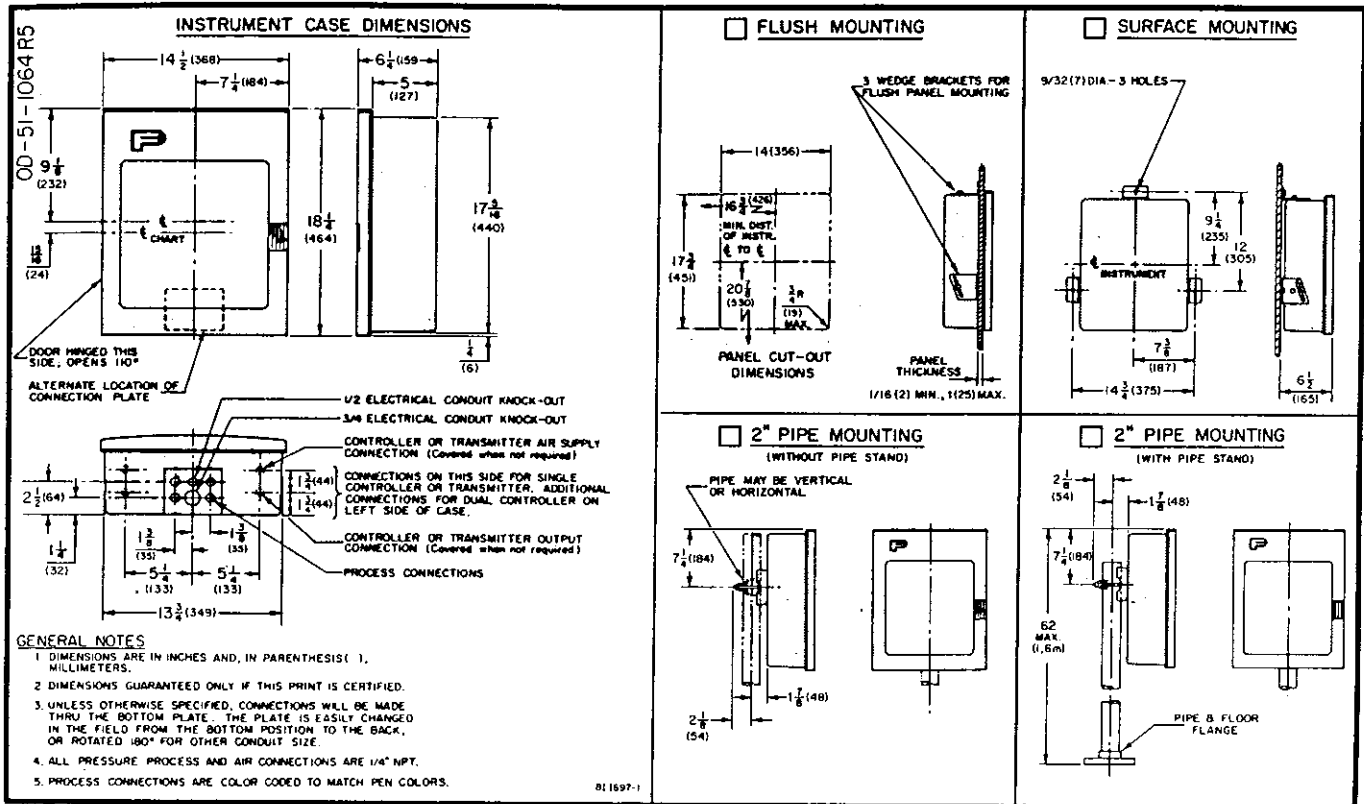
OUTLINE & MOUNTING DIMENSIONS
